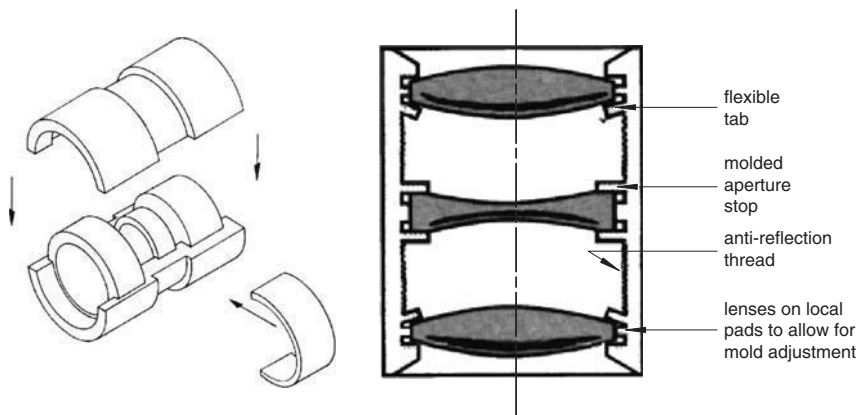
Clamshell lens housing. Left: the device consists of two identical housing half-shells, between which the lenses are inserted. The whole assembly is clamped by an expansion C-ring, which is snapped in the slot [2]. Right: internal mounting details [9] such as flexible tabs, integrated aperture stops, antireflection threads, and load pads to allow for mold adjustment [3].
